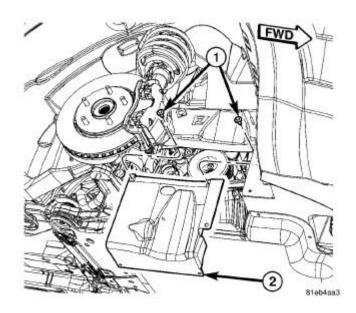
Right Lower Splash Shield Courtesy of CHRYSLER GROUP, LLC
